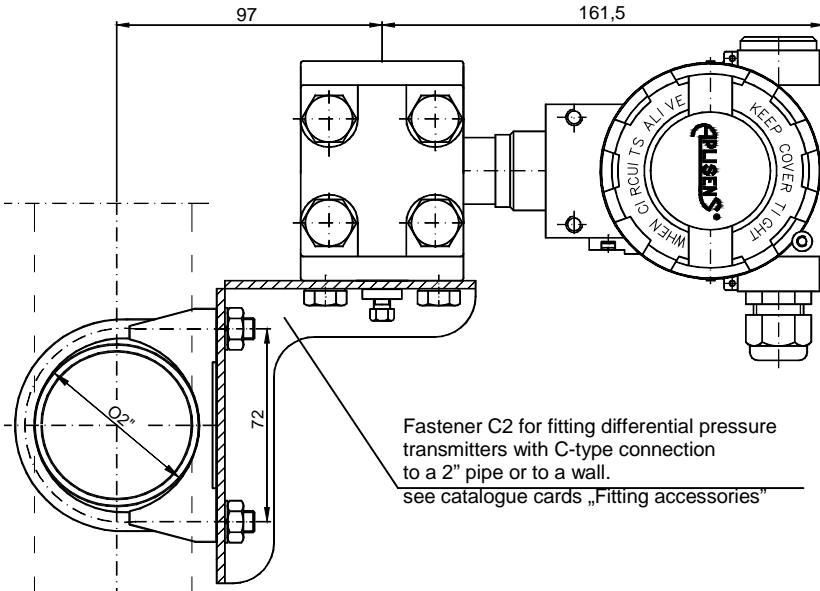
Example: how to install the APR-2000ALW transmitter on a vertical or horizontal pipe.
